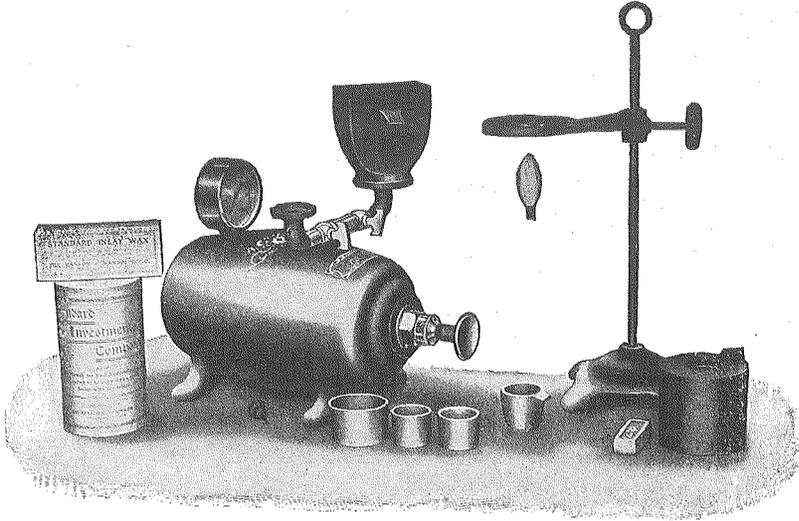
The Ransom & Randolph Vacuum Casting Machine
